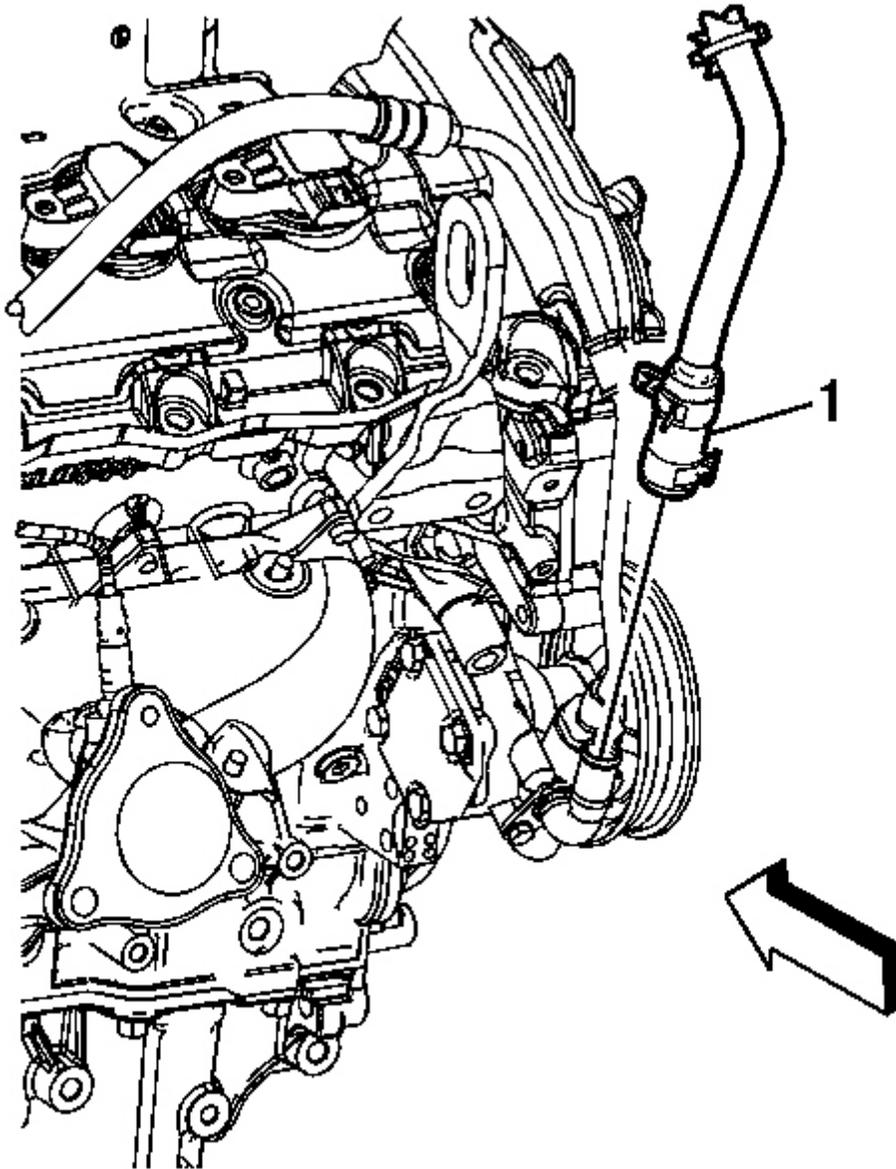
Identifying Power Steering Fluid Reservoir Outlet Hose
